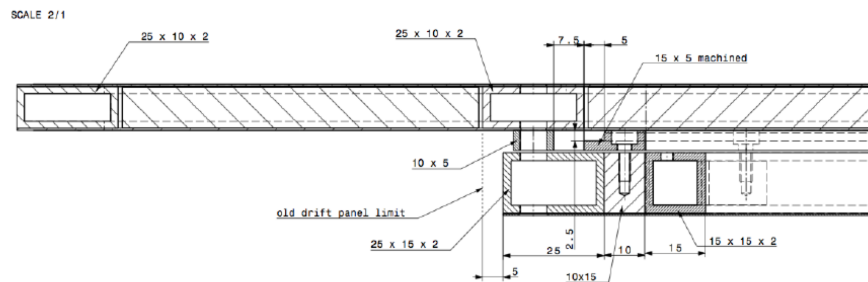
Cross-sectional view of the frames of the read-out panels. The profiles along the read-out side is shown with the gas channel. The mesh frame is also shown [4].
